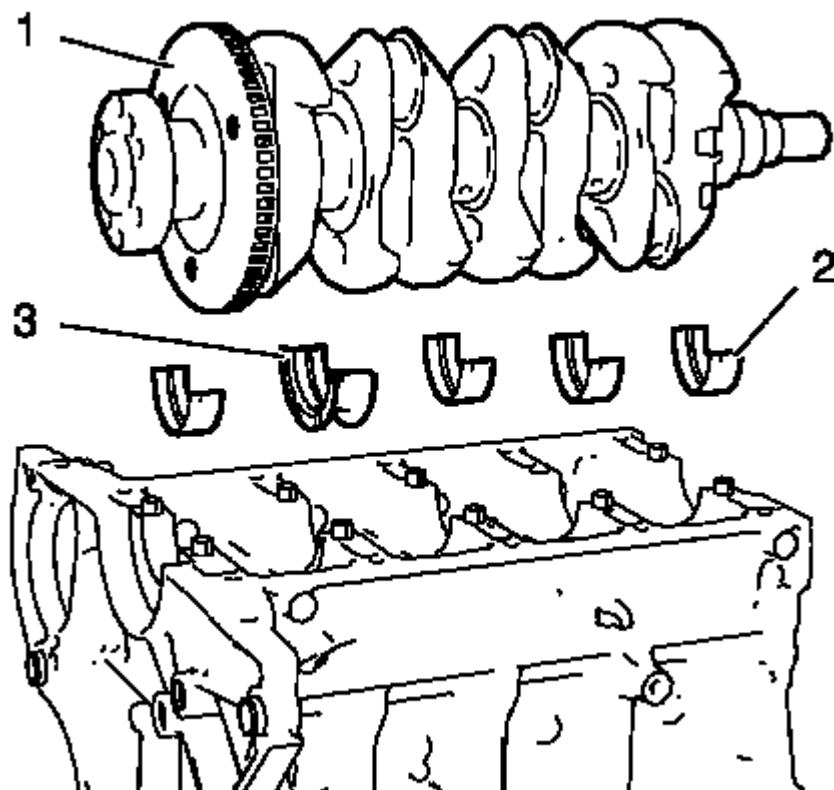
Crankshaft, Upper Crankshaft Bearings And Upper Crankshaft Thrust Bearing
